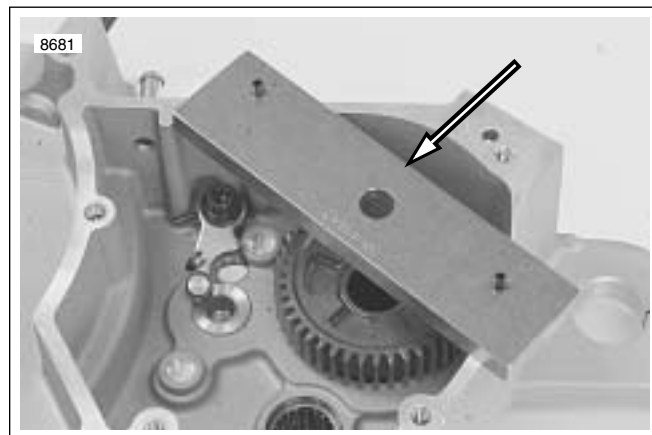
Bearing Remover Cross Plate Mounting (Part No. B-45847)
